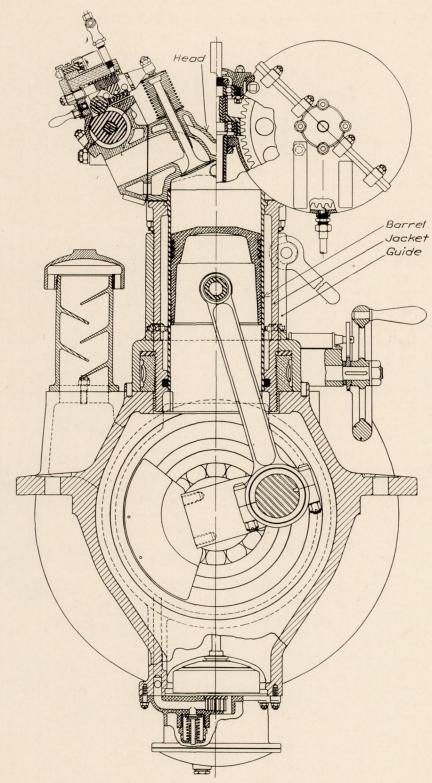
N. A. C. A. universal test engine—transverse cross section
